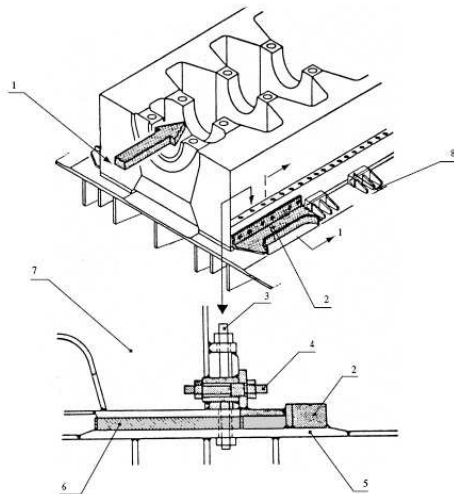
Foundation Plate Installation Schema (1- Helice Pulley, 2- Standard Foundation Bolts, 3- Transverse Bute, 4- Adjustable Foundation Bolts, 5- Superior Surface of Double-Bottom Tank, 6- Holders; 7- Foundation plate)
